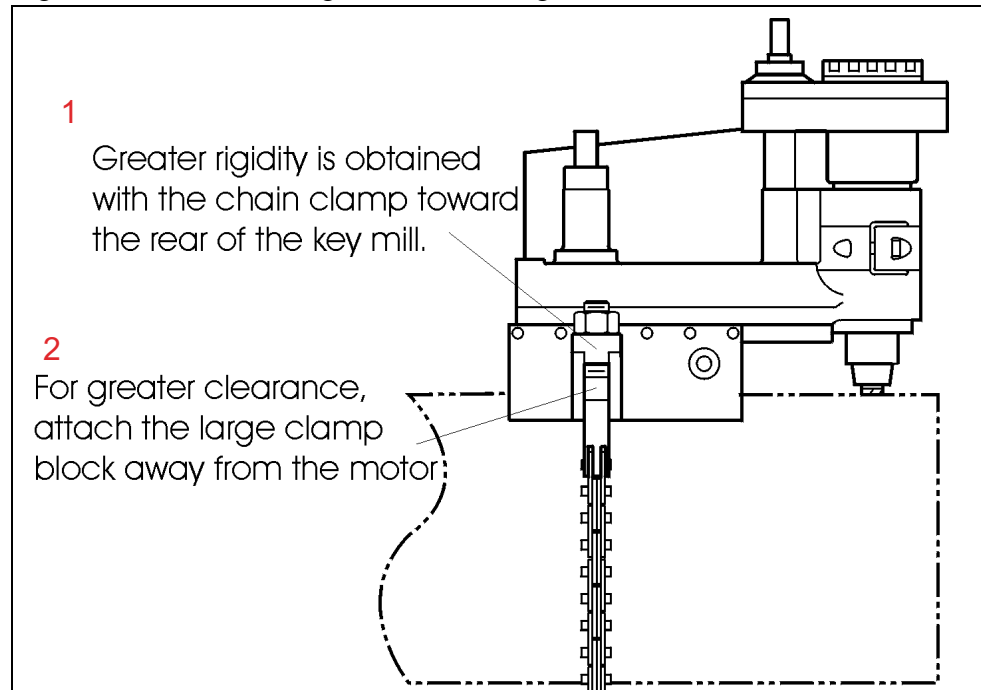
KM3000 LARGE SHAFT MOUNTING
